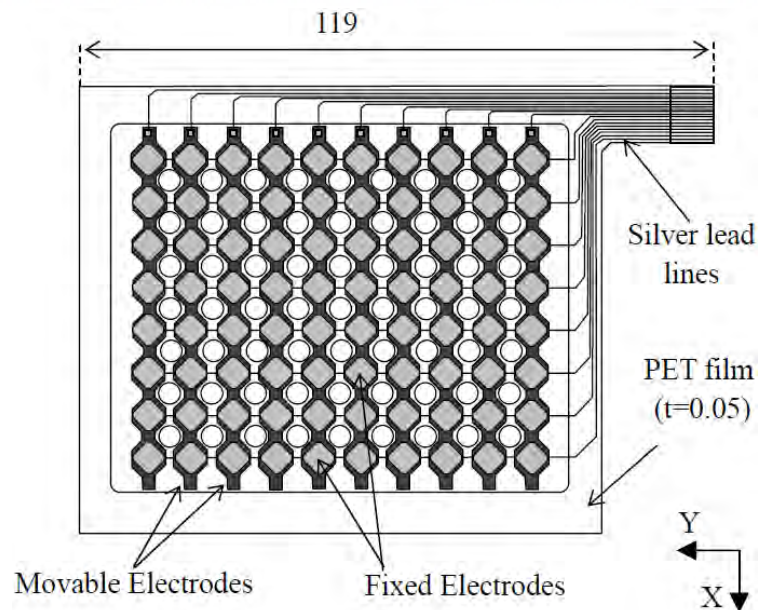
(b): Bottom View of the Sensor Sheet Structure
